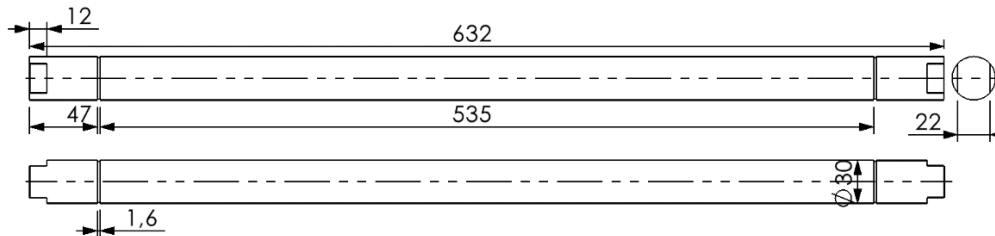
2D drawing of roller shaft for side roller-LKAB with dimension[14]
